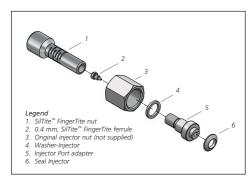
Exploded diagram of the Injector Adapter SilTite™ FingerTite assembly
